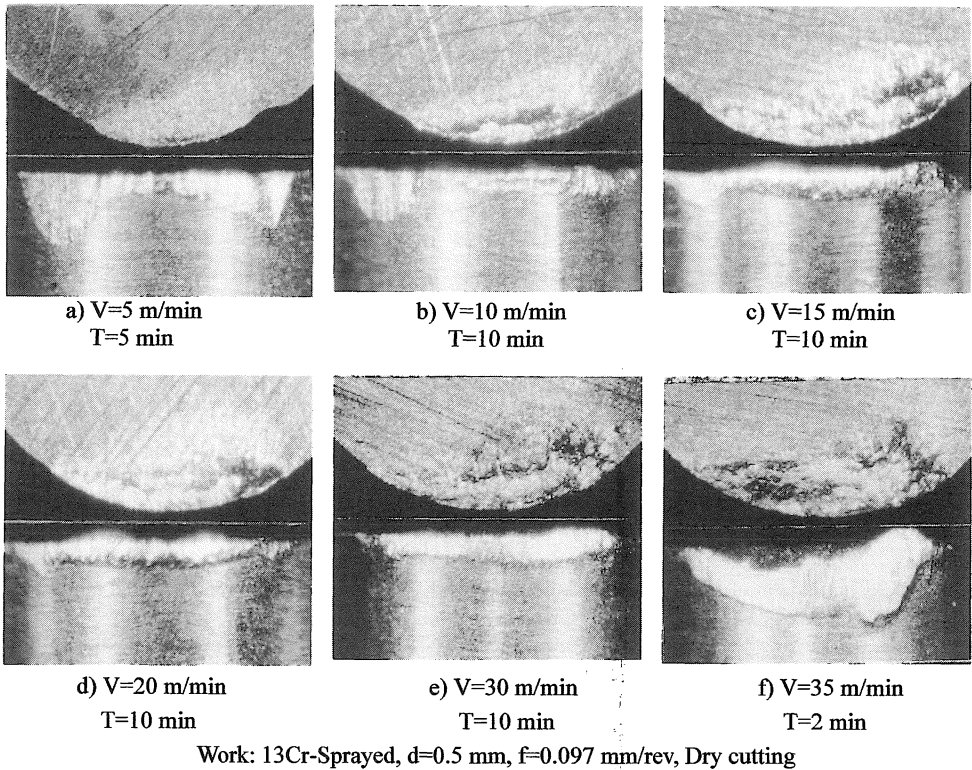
Wear patterns of carbide K10 when changed the cutting speed in machining of 13Cr sprayed materials
